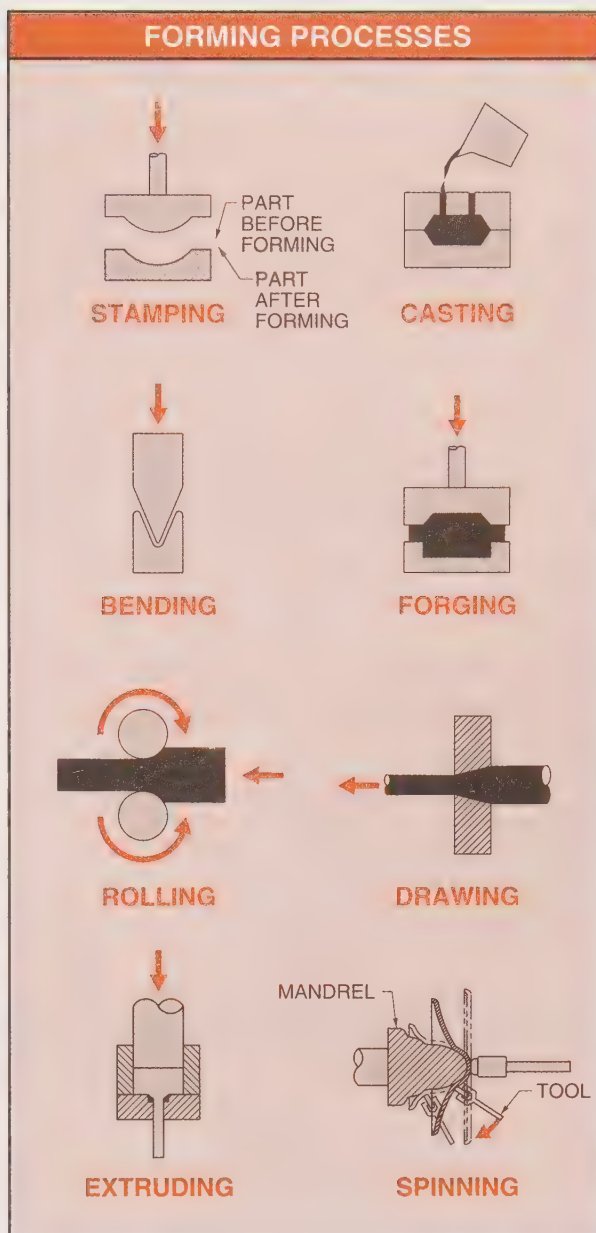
Forming processes used to shape the part prior to machining are determined by the mechanical properties of the materials.
